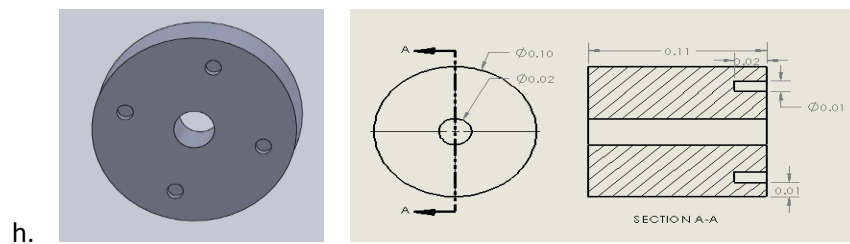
13 h) Billet container 3D, 2D and section view drawing
